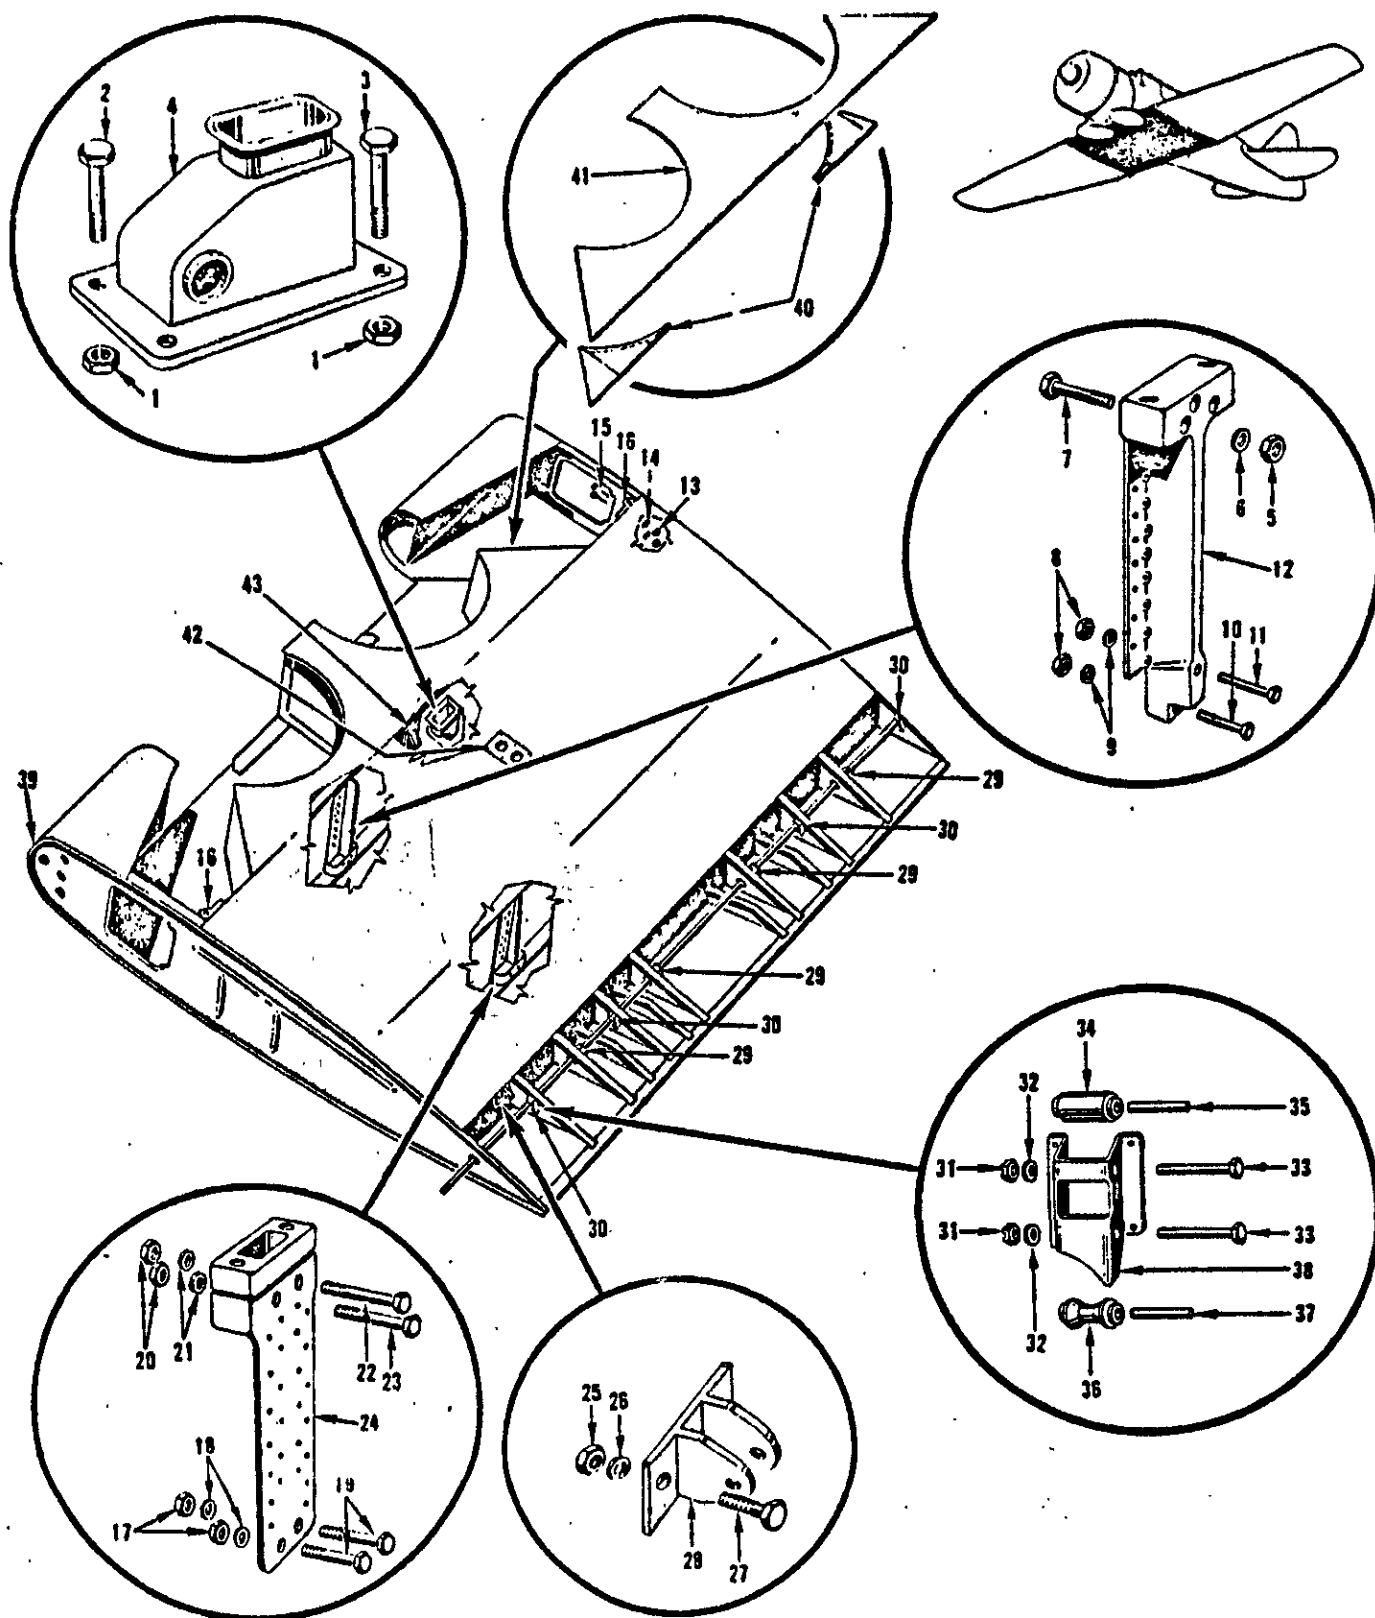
WING CENTER SECTION COVERED ASSEMBLY
